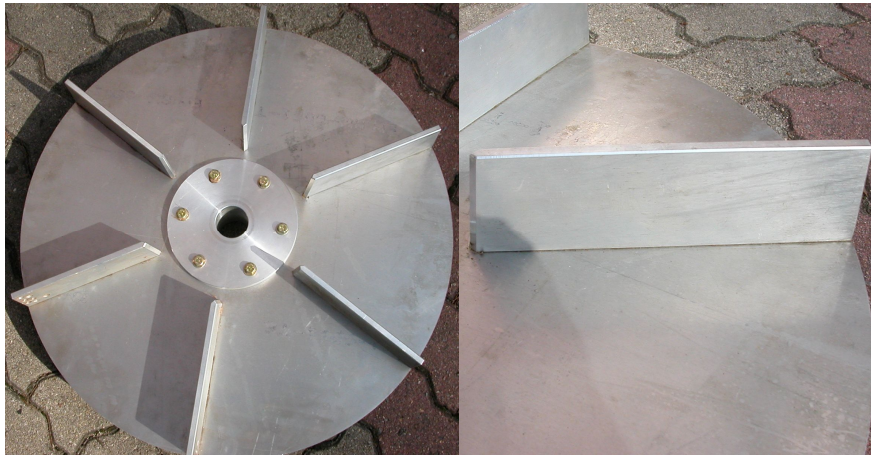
Schematic shape of the fan for the improved prototype with 600mm diameter, 6EA wings(60° array)
